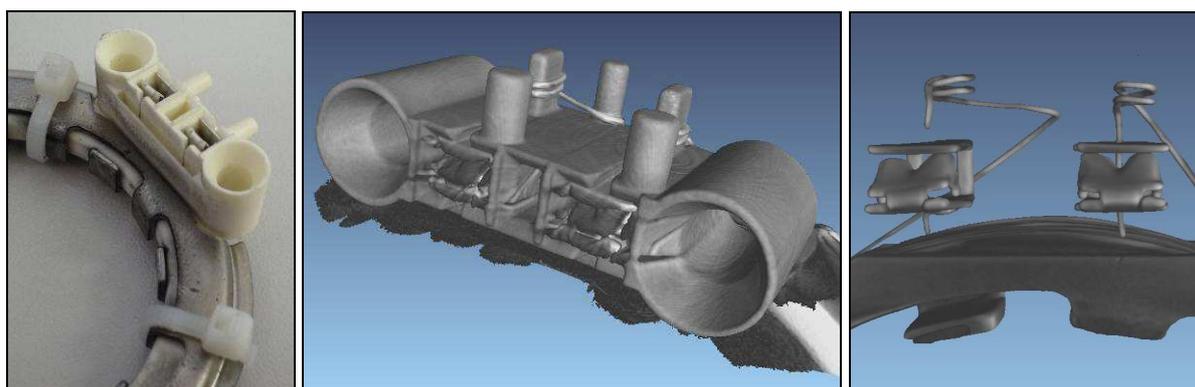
Tacho-reel a) real part, b) point-cloud of connector, c) separated plastic cover of connector
